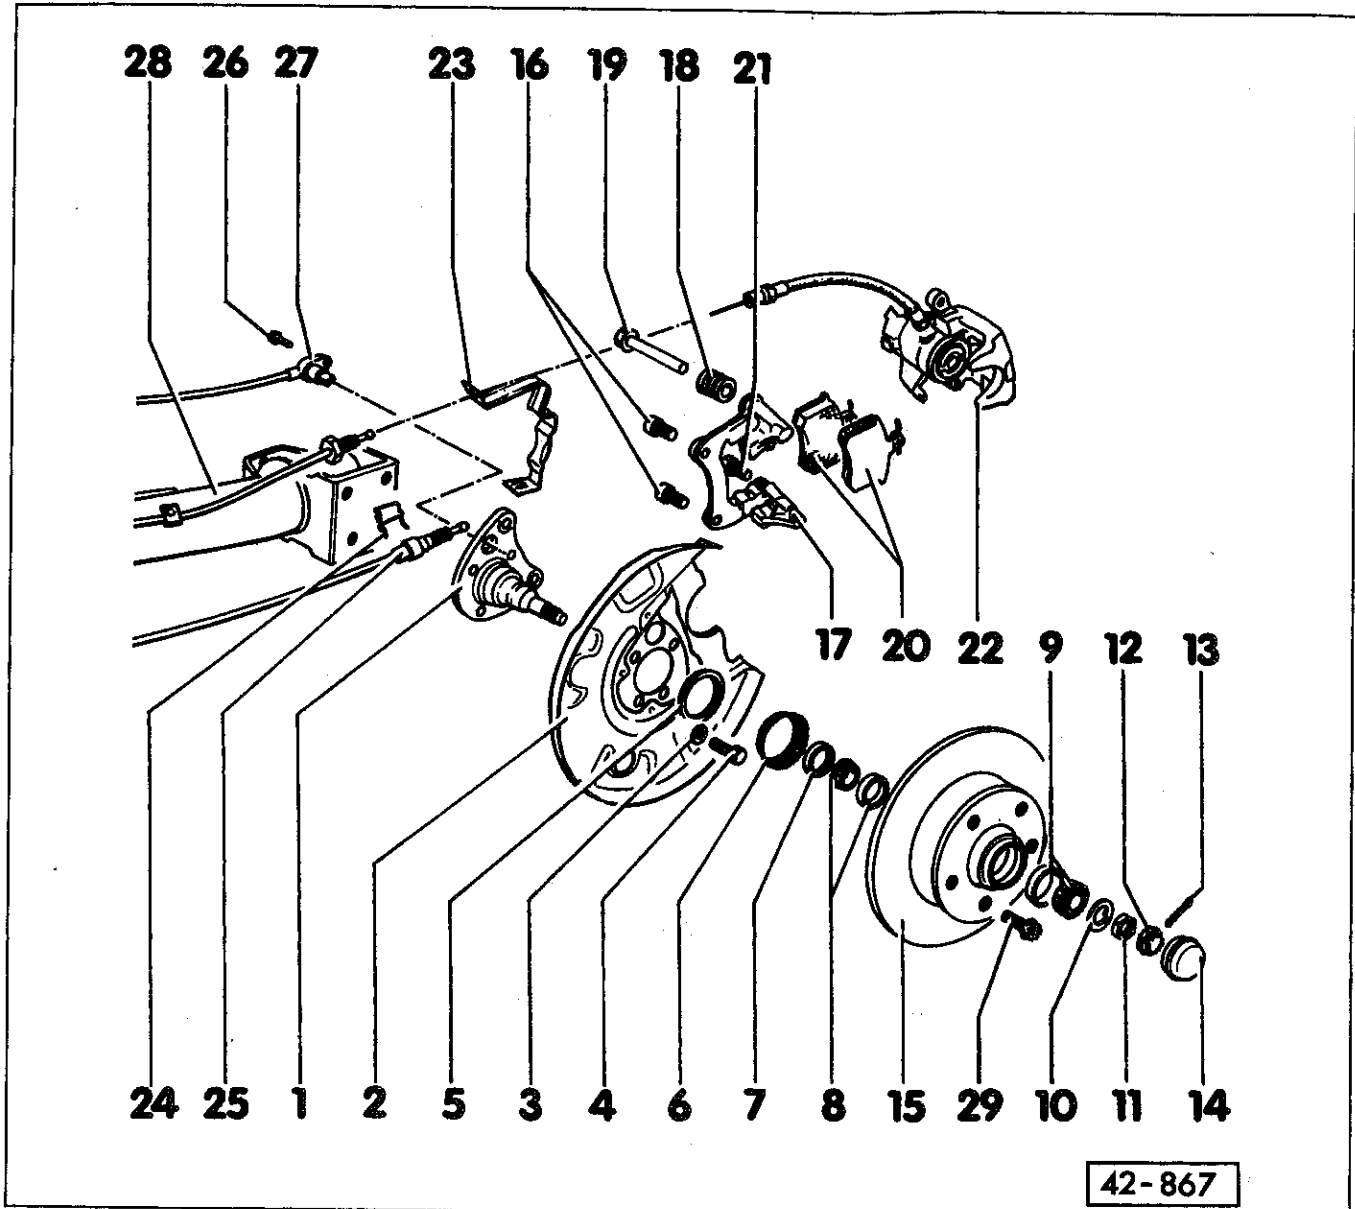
Exploded view of rear disc brake assembly. Components shown are for 5-bolt wheels, assembly and service are the same for vehicle with 4-bolt wheels.
